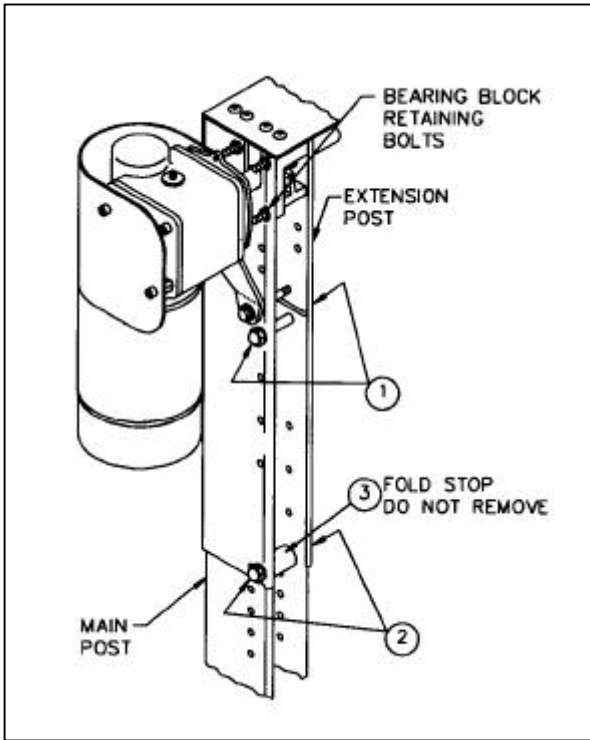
STANDARD CONFIGURATION - EXTEND
